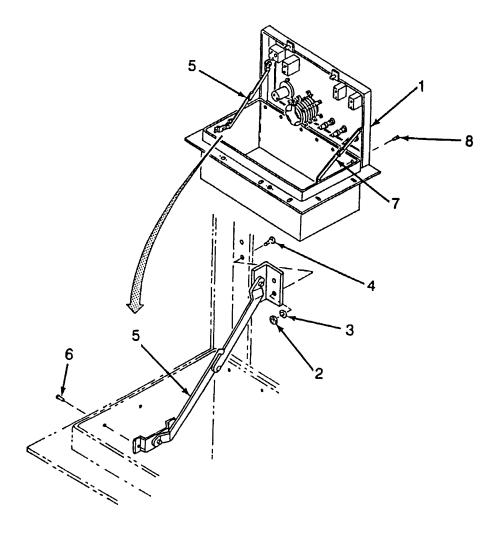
Control Box Disassembly (Sheet 1 of 2)
